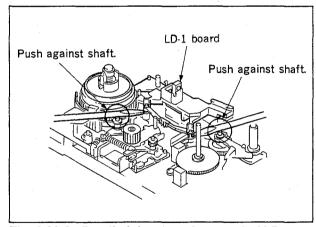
Detailed drawing of removal of LD-1 board ass'y
